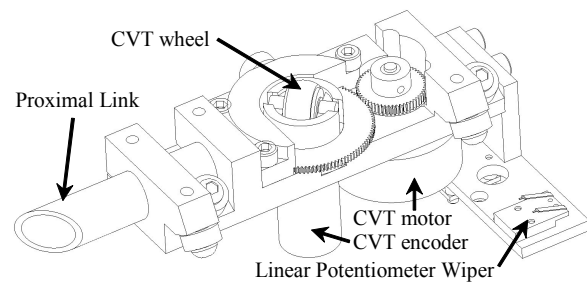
Mounted on the carriage is a steering assembly, consisting of a wheel preloaded via Belleville washers, an optical encoder, a steering motor coupled via gears and a wiper for a linear potentiometer.
